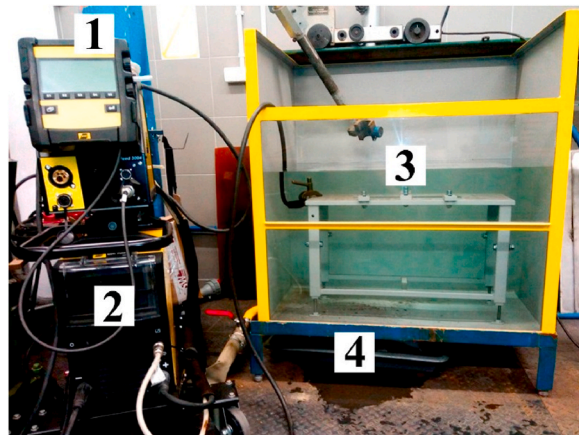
The welding stand, 1 – Control panel, 2 – Welding power source, 3 – Welding table, 4 – Water tank.
